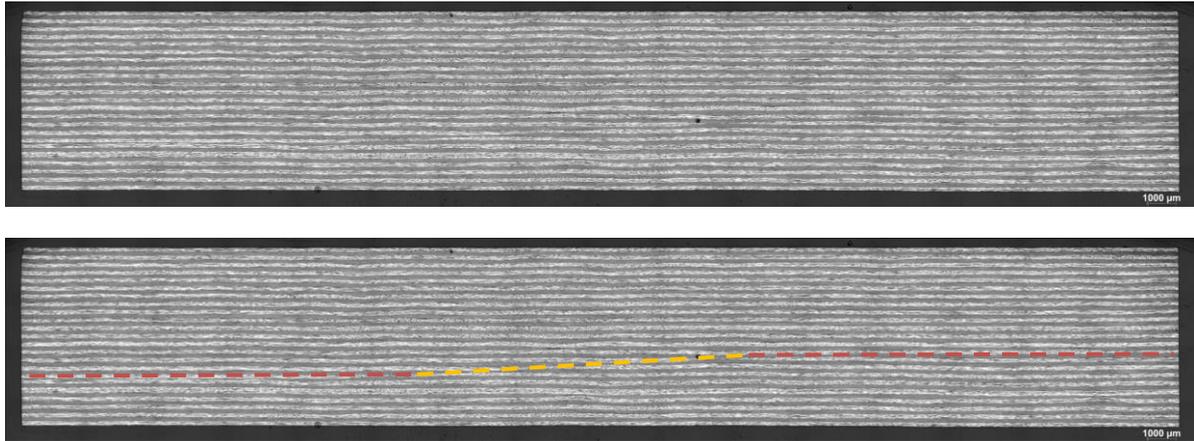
Top; Cross-section A-A: Location of weld interface not visible (top laminate 4.7 mm, bottom 1.7mm, including ramp) Bottom; Same cross-section indicating location of weld interface.
